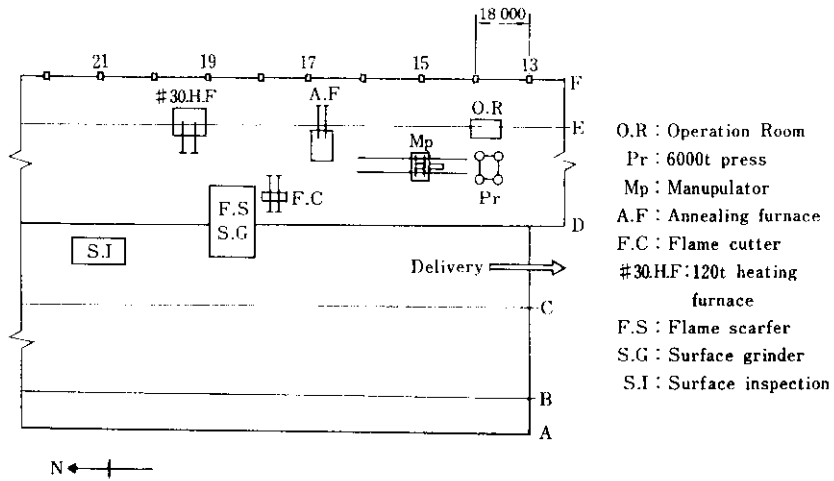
Layout of forging shop, concerning forging practice of the slab
